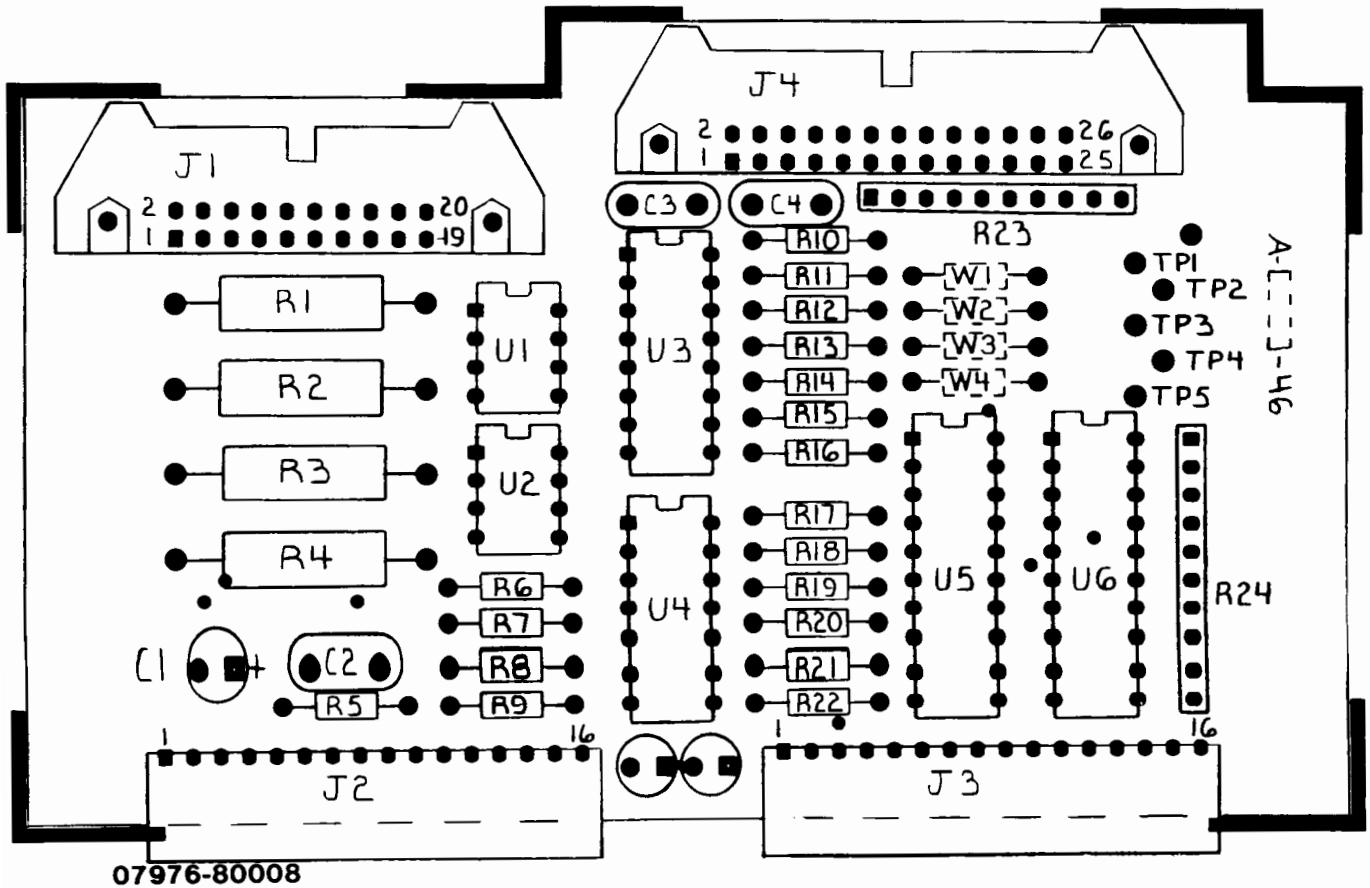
Operator Panel/Control PCA (07976-60008) Parts Location Diagram
